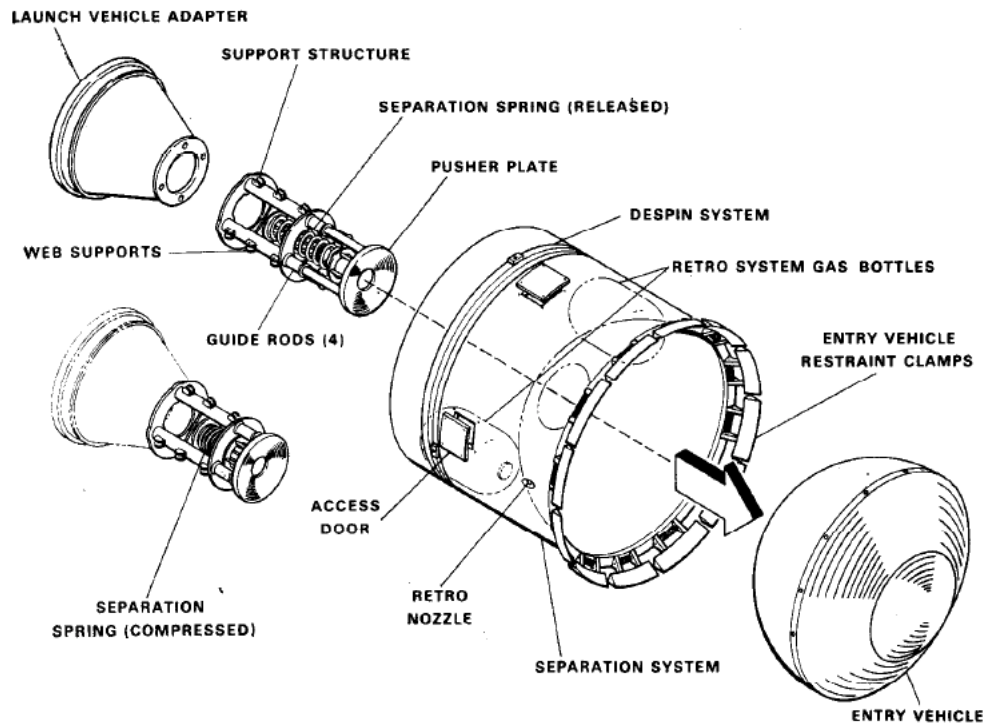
Exploded view of the PAET spacecraft (Image taken from Ref.[3])
